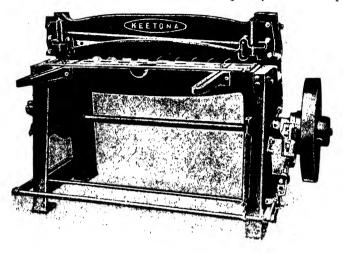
POWER-DRIVEN GUILLOTINE SHEARING MACHINE
